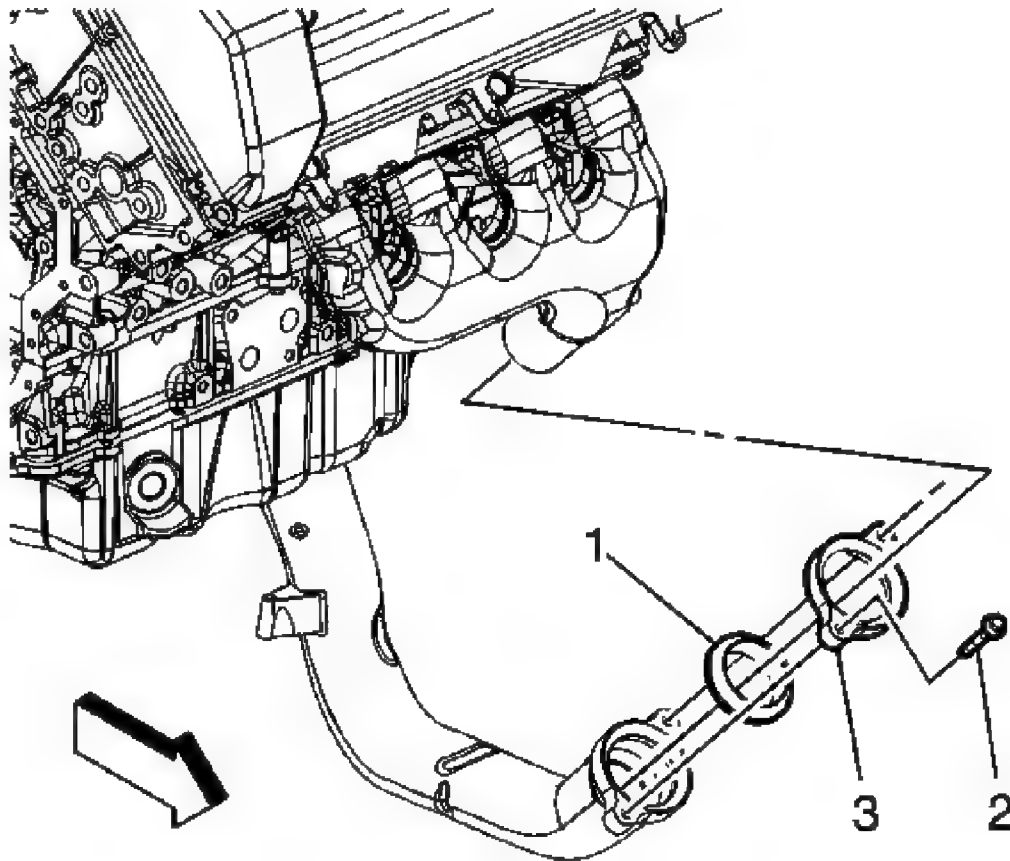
Identifying Exhaust Manifold Front Pipe Bolts
